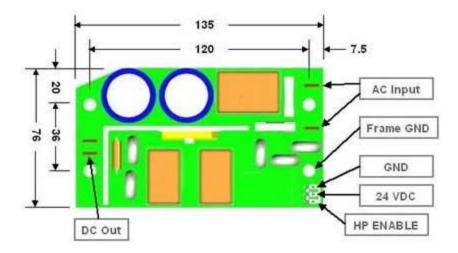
Power Supply with Four 4.1 mm Through Holes for Mounting
